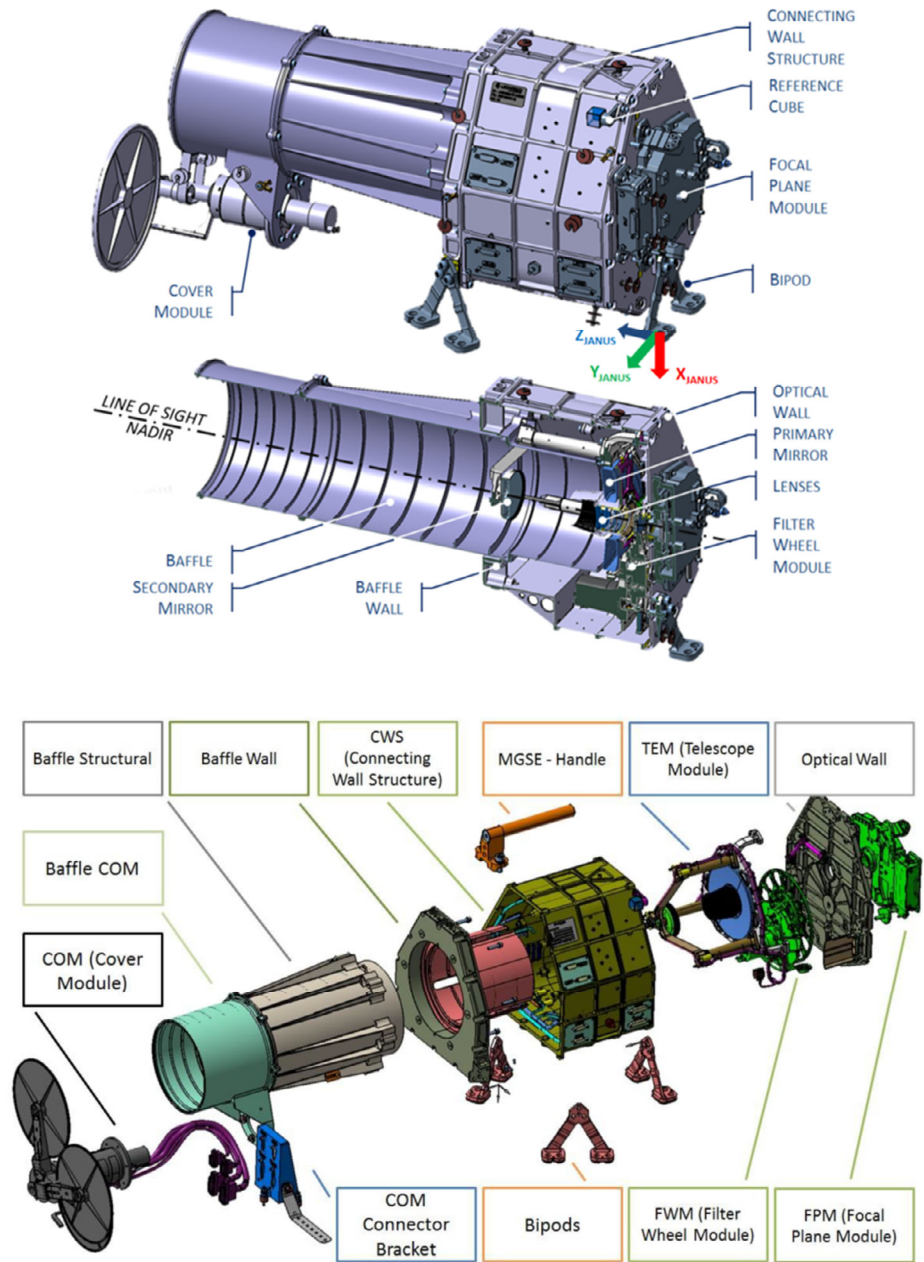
JANUS OHU Mechanical Layout. Top: integrated and cut view. Bottom: exploded view with main elements tagged
